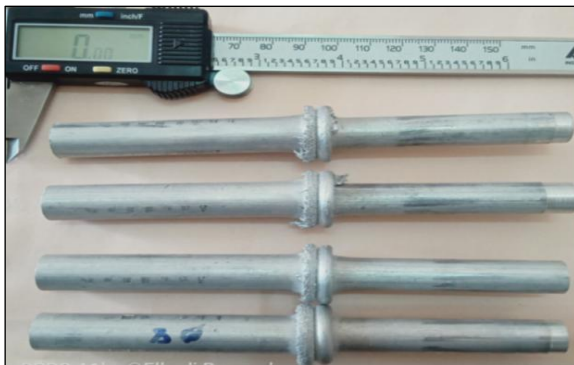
Welded samples just after rotary friction welding.
